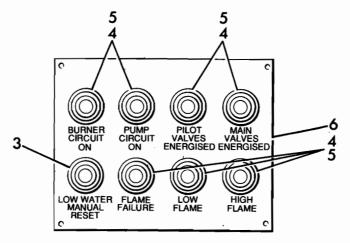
BURNER ASSEMBLY SPARE PARTS
